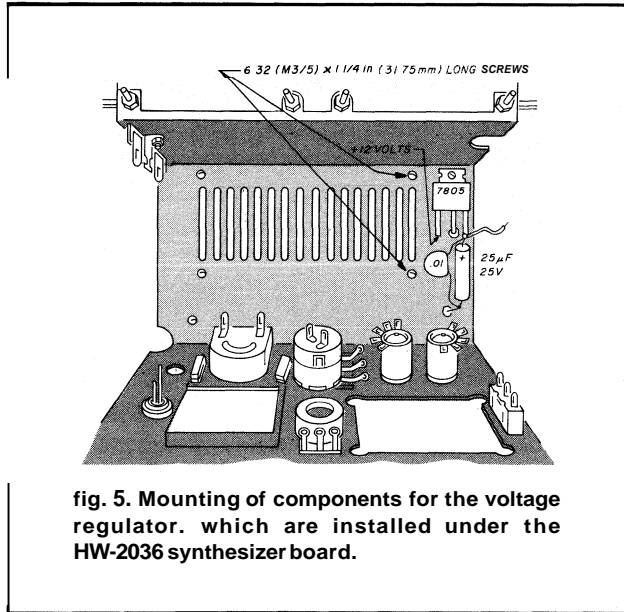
Mounting of components for the voltage regulator, which are installed under the HW-2036 synthesizer board.
